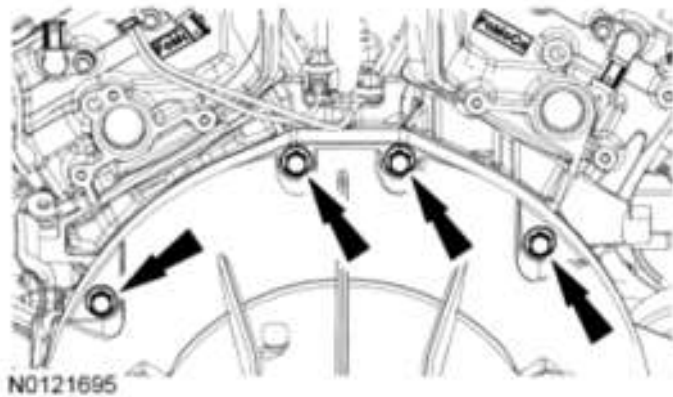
Locating Upper Bell Housing-To-Engine Bolts
